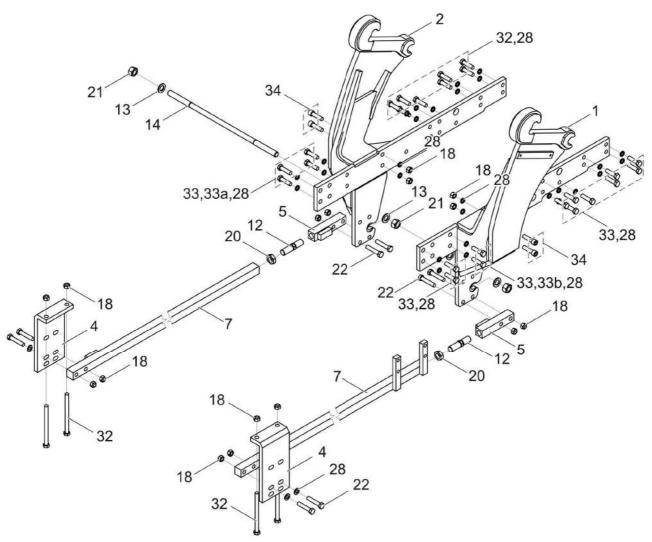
A Mounting bearing frame on 82A/82SA/82TSA; 82AII/82SAII/82TSAII tractors
